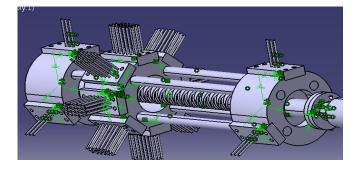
Drive Mechanism module with aligned holder bar. [7]
